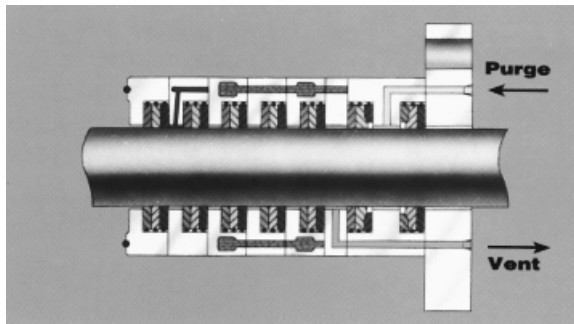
Lubrication and cooling passages on rod packing. (*Dresser-Rand Company, Painted Post, N.Y.*)
